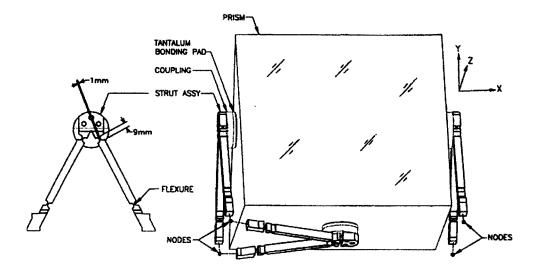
Sketch of the fixed prism assembly showing its six-strut mounting configuration. (From Sheinis et al.¹⁷)
